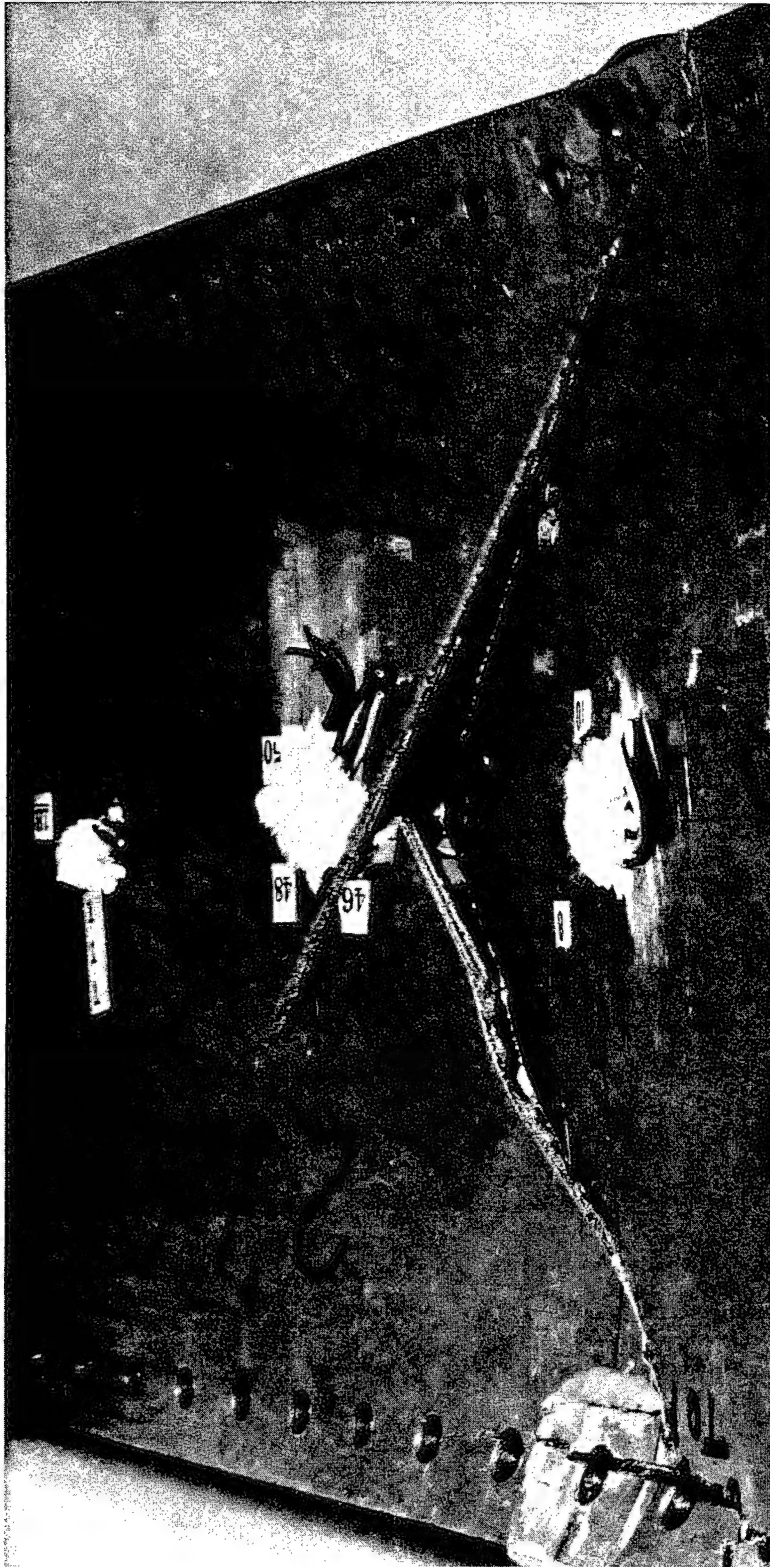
BOX BEAM SUBCOMPONENT FAILURE LOCATION
